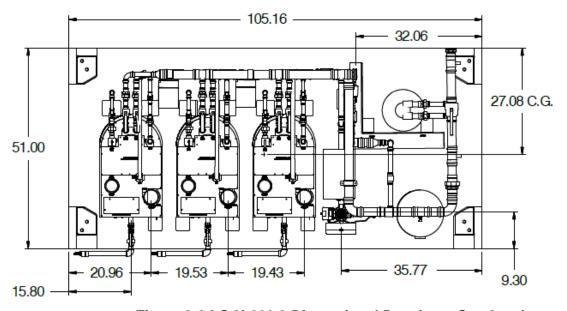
LC-N-600-3 Dimensional Drawing – Overhead
